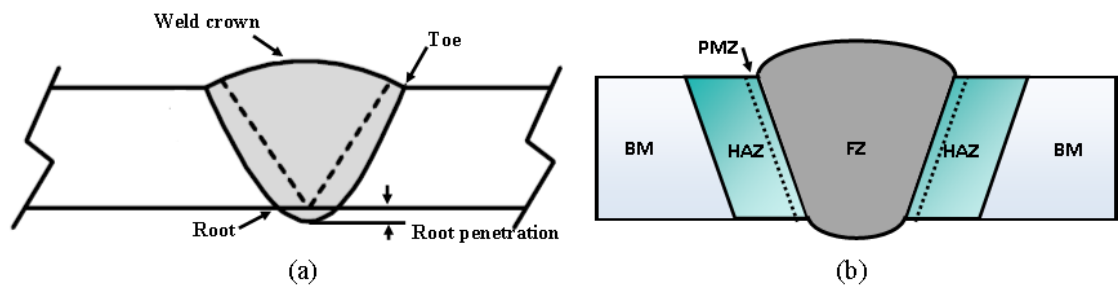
Schematic drawing of a butt joint (a), and illustration of zones in a single groove weld (b)
